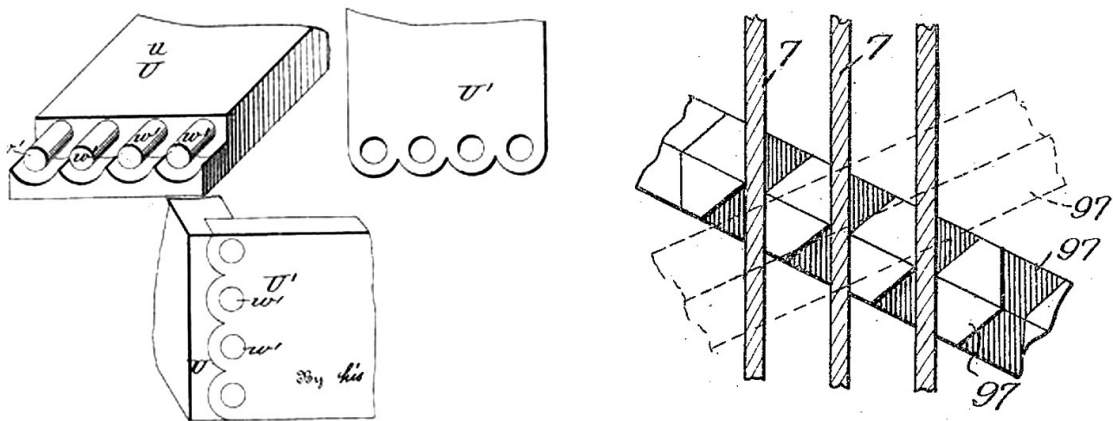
Integral Plate Joints fabricated with Machine-tool-technology - *left side*: Joint fabricated with the Knapp Dovetailing Machine (ca. 1870), [UR03, p.32], *right side*: Kelly Dovetailing Machine (1917) [Kel17]
